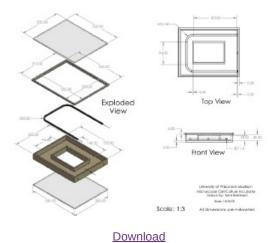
Solidworks drawing showing more detailed dimensions of all the parts in the incubator.
